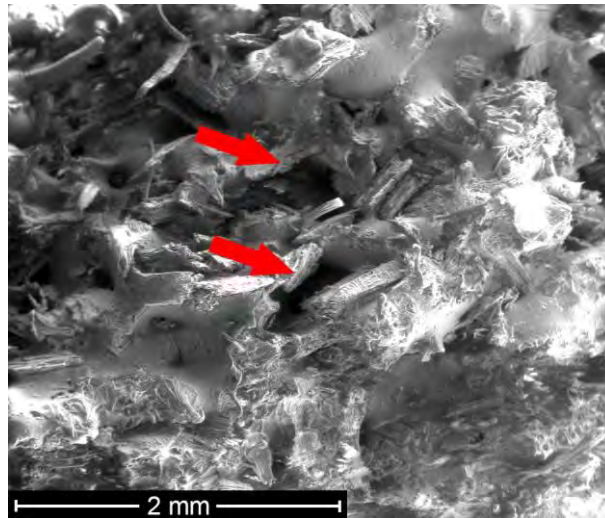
Fracture surface of a tensile test specimen. Rotomolded WPC from Group B (t_H of 40 min).
